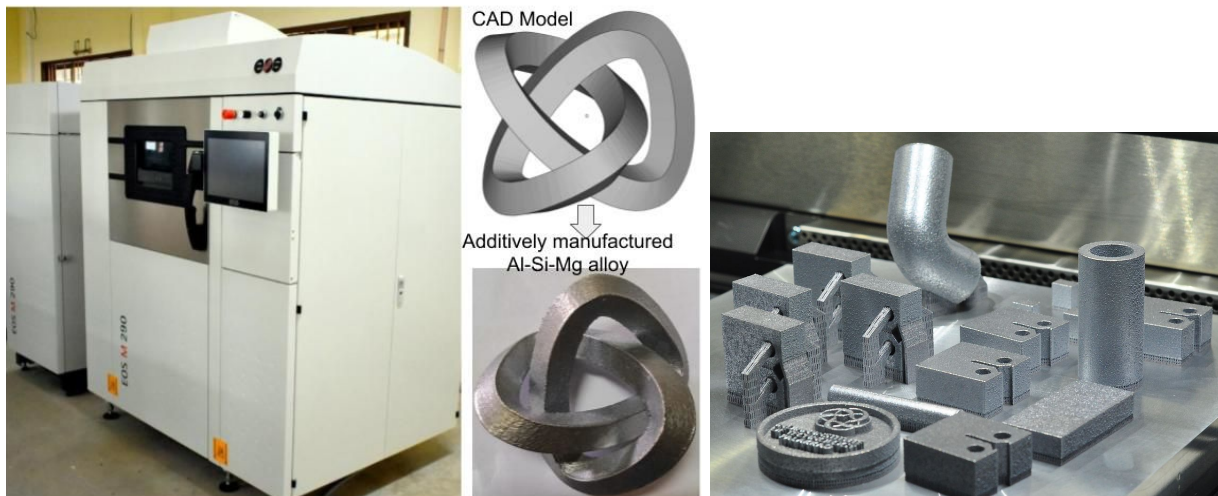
3D Metal Printer with Al-Si-Mg printed components
